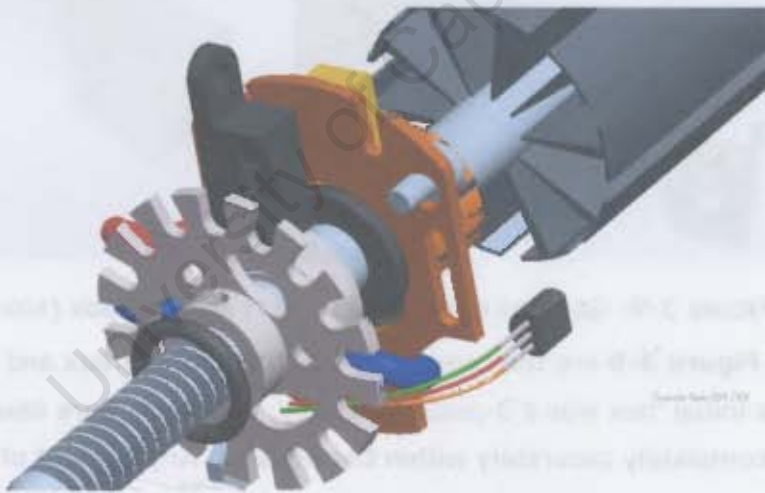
GEARBOX SHOWING SHAFT ENCODER AND TEMPERATURE SENSOR
